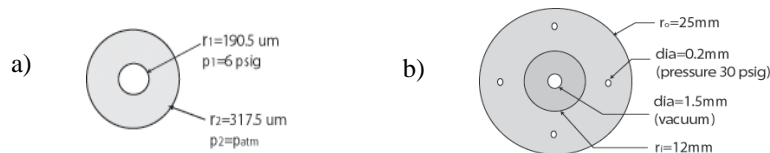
Geometry and dimensions of (a) top bearings and (b) bottom bearings.
